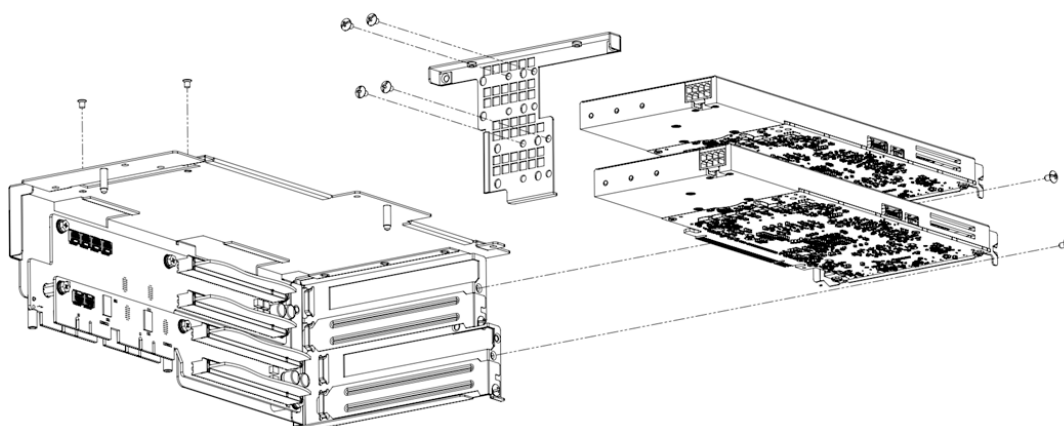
Assembly of FH/FL Expansion Cards (GPU Cards)/ 安装全高全长扩充卡 (GPU 卡) / 安裝全高全長擴充卡 (GPU 卡)
